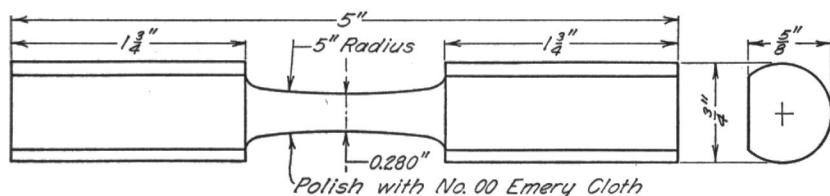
SPECIMEN FOR REPEATED-TORSION FATIGUE TESTING MACHINE
